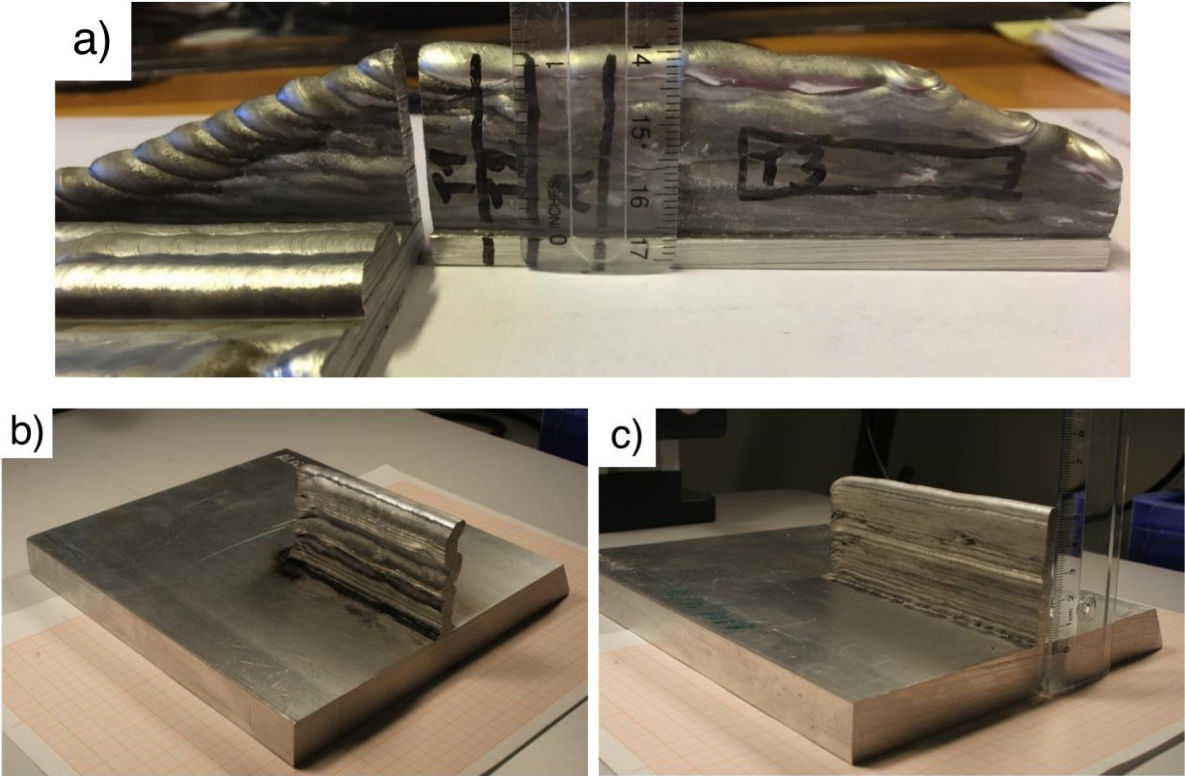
Images of the three deposited wall structures. a) the first AA4020 wall, b) the second AA4020 wall and c) the first AA5083 wall.
